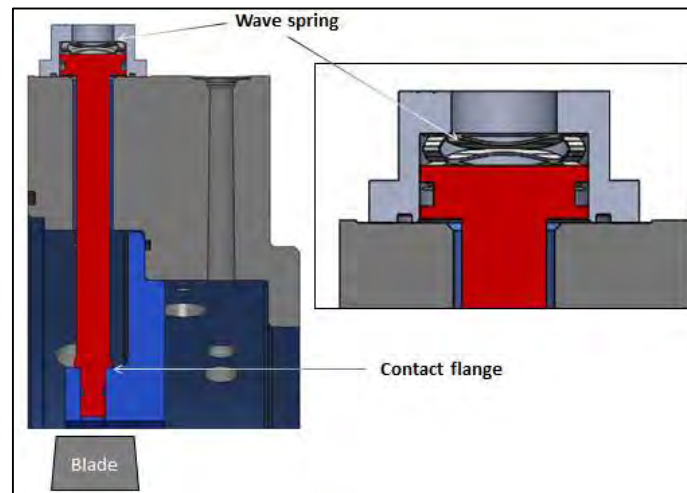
Custom Probe Assembly, Shown in Red, Which Accepts Threaded Sensors
